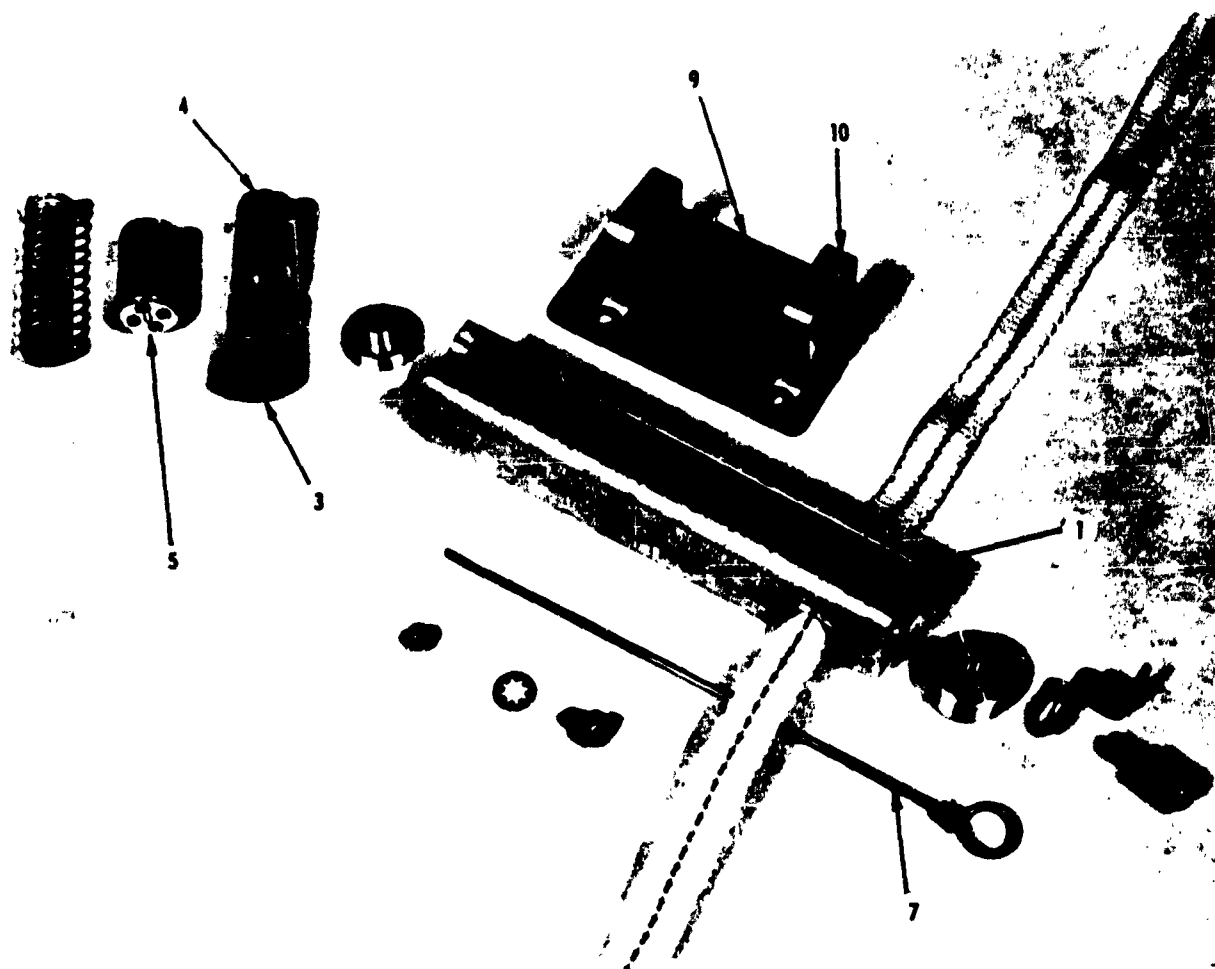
Reefing Line Cutter, Type M-2 (Disassembled)
